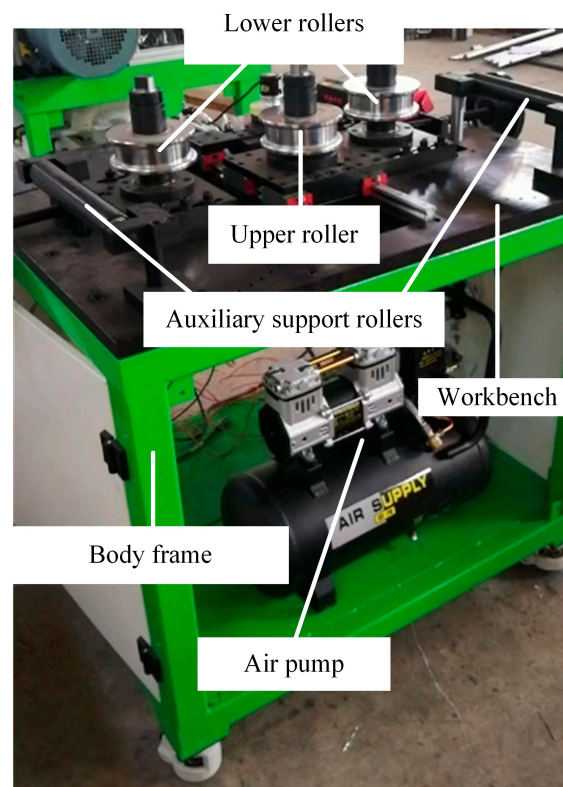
Horizontal symmetrical three-roll roll bending machine.
